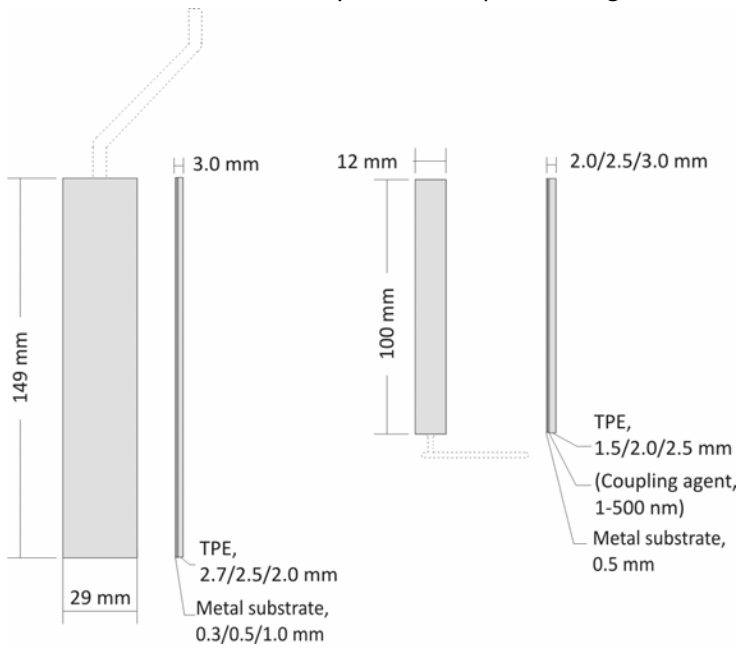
The structure and dimensions of the hybrids manufactured with Mould I (left) and Mould II (right). The mould channel location is shown in dashed line.
